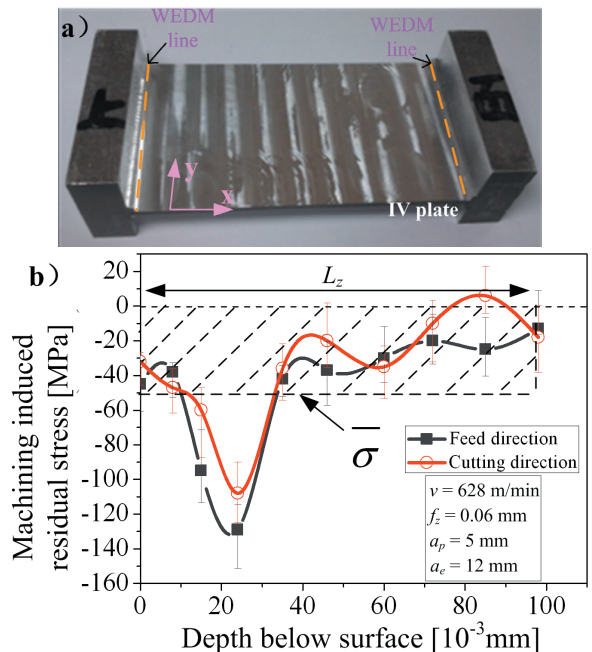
Specimen and machining-induced residual stresses profiles of 7050-T7451 thin-walled plate
